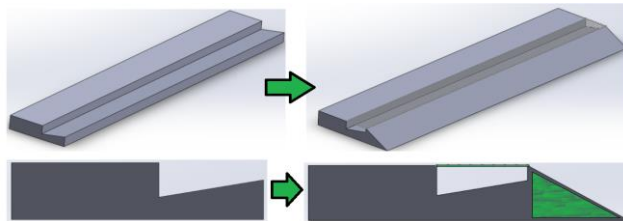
Proposed addition for water recycling system on Training Plaza
